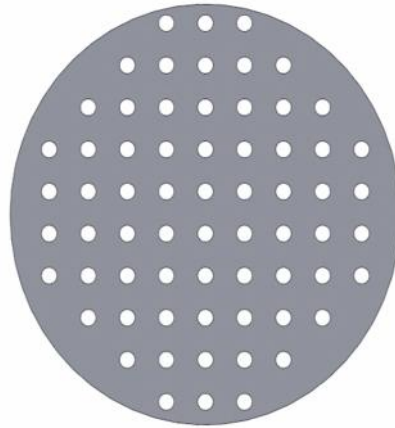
Dimension of Swirling Fluidized Bed.
